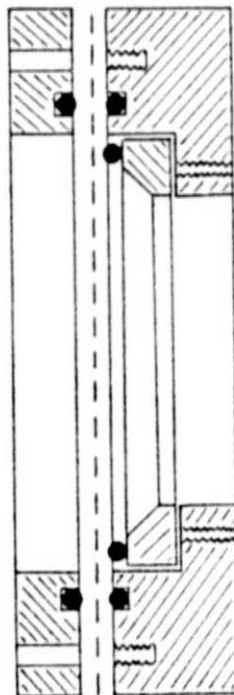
Cross Sectional view of wire mesh holder. Three o-rings are used to hold the mesh taut.
